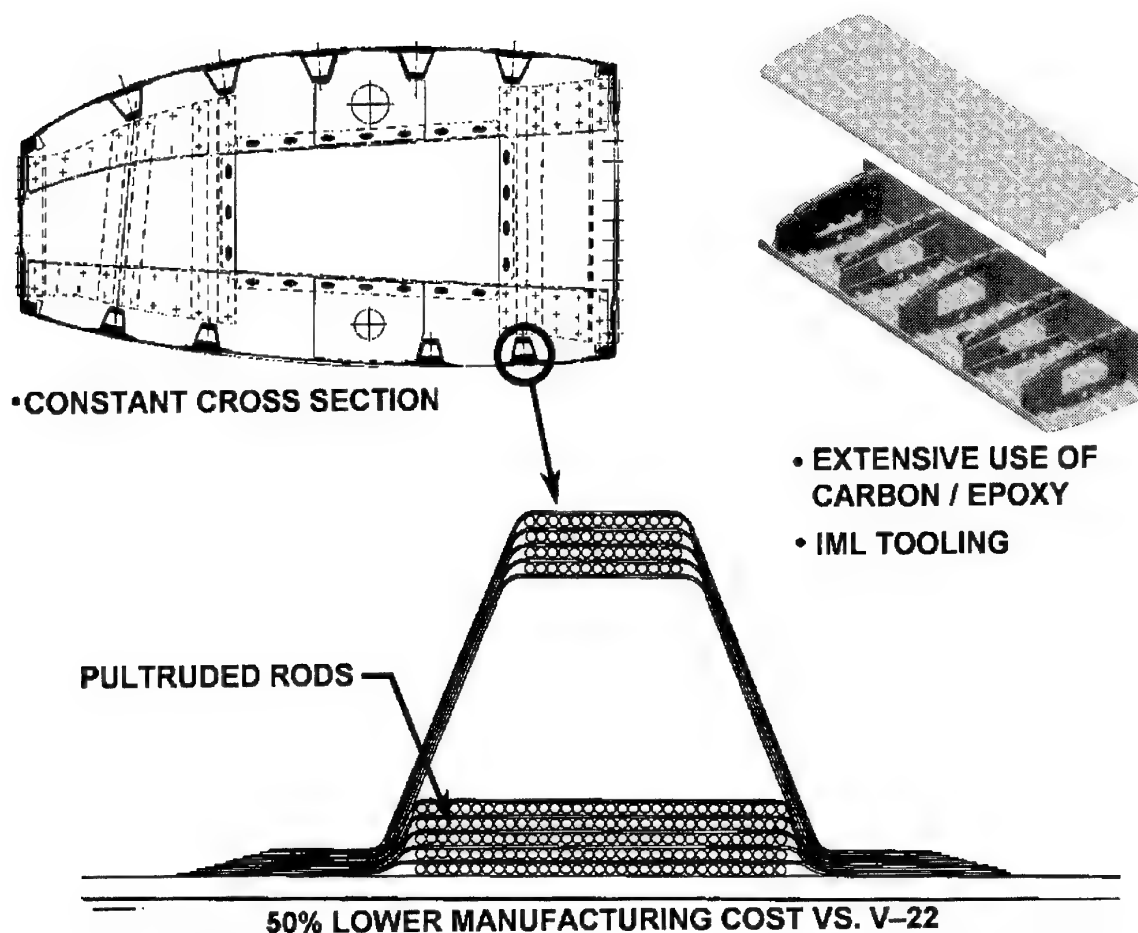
Exploded view of torque box, showing hats and rods, bondline, and exploded view of rib.
